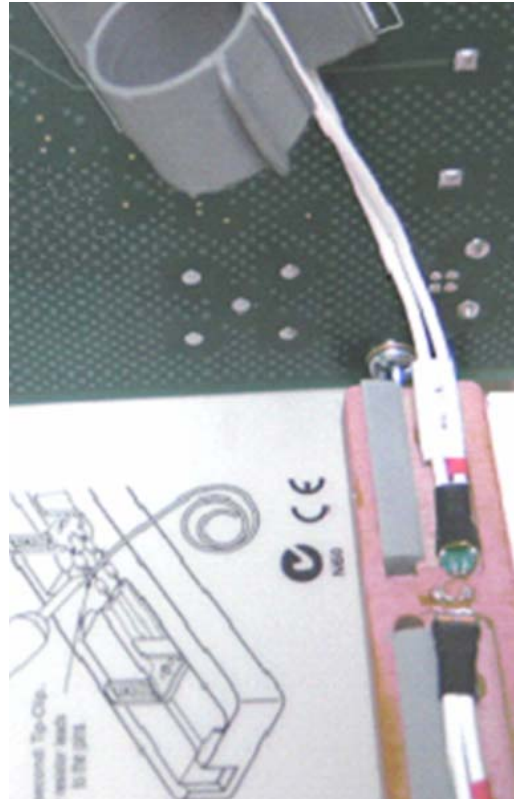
Two P75TLRSTs Soldered to the Solder Pins
